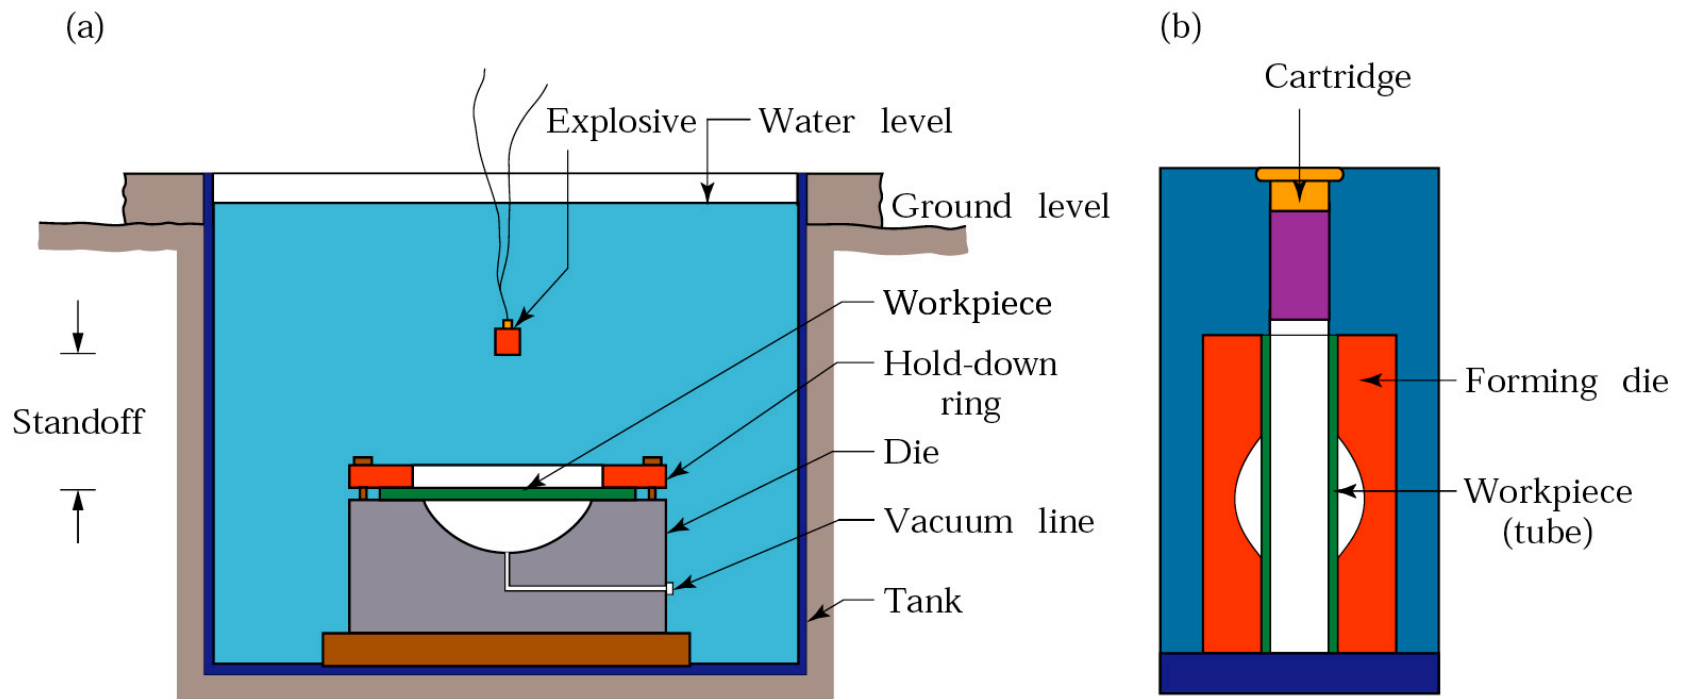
(a) Schematic illustration of the explosive forming process. (b) Illustration of the confined method of explosive bulging of tubes.
